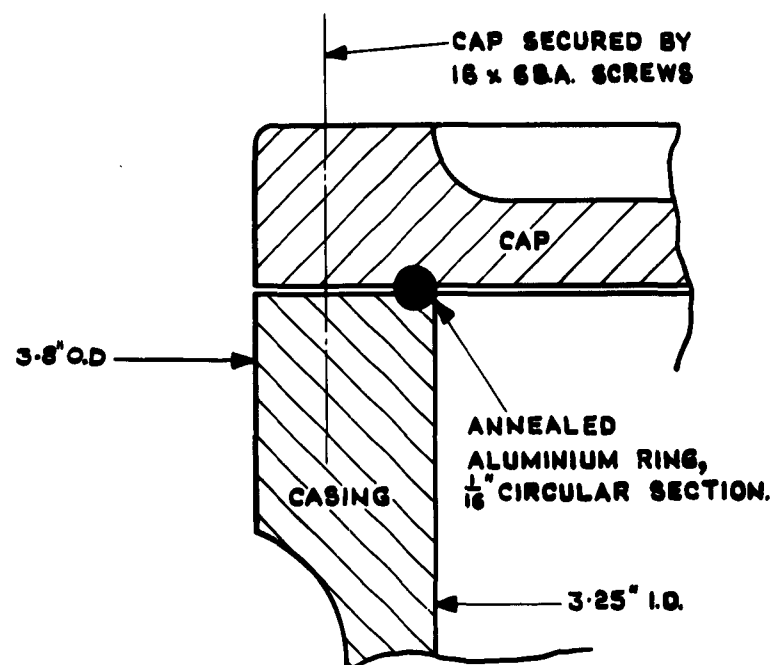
SECTION OF ALUMINIUM GASKET SEAL.
